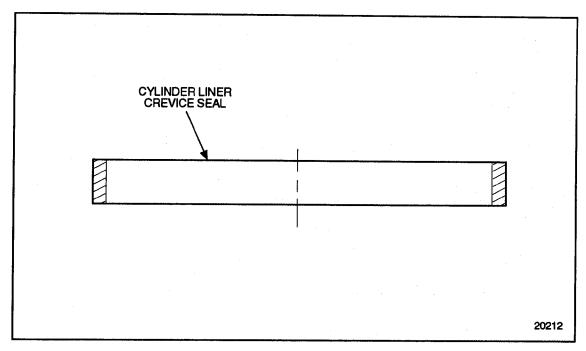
Cylinder Liner Crevice Seal Cross-Section
